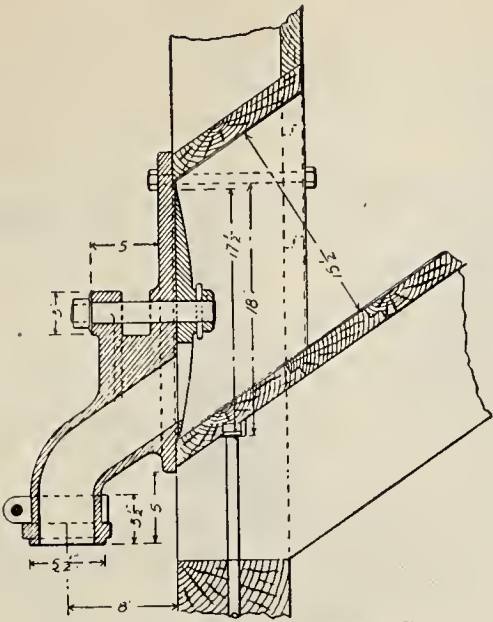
ERIE RAILROAD SAND VALVE IN STORAGE BIN.
